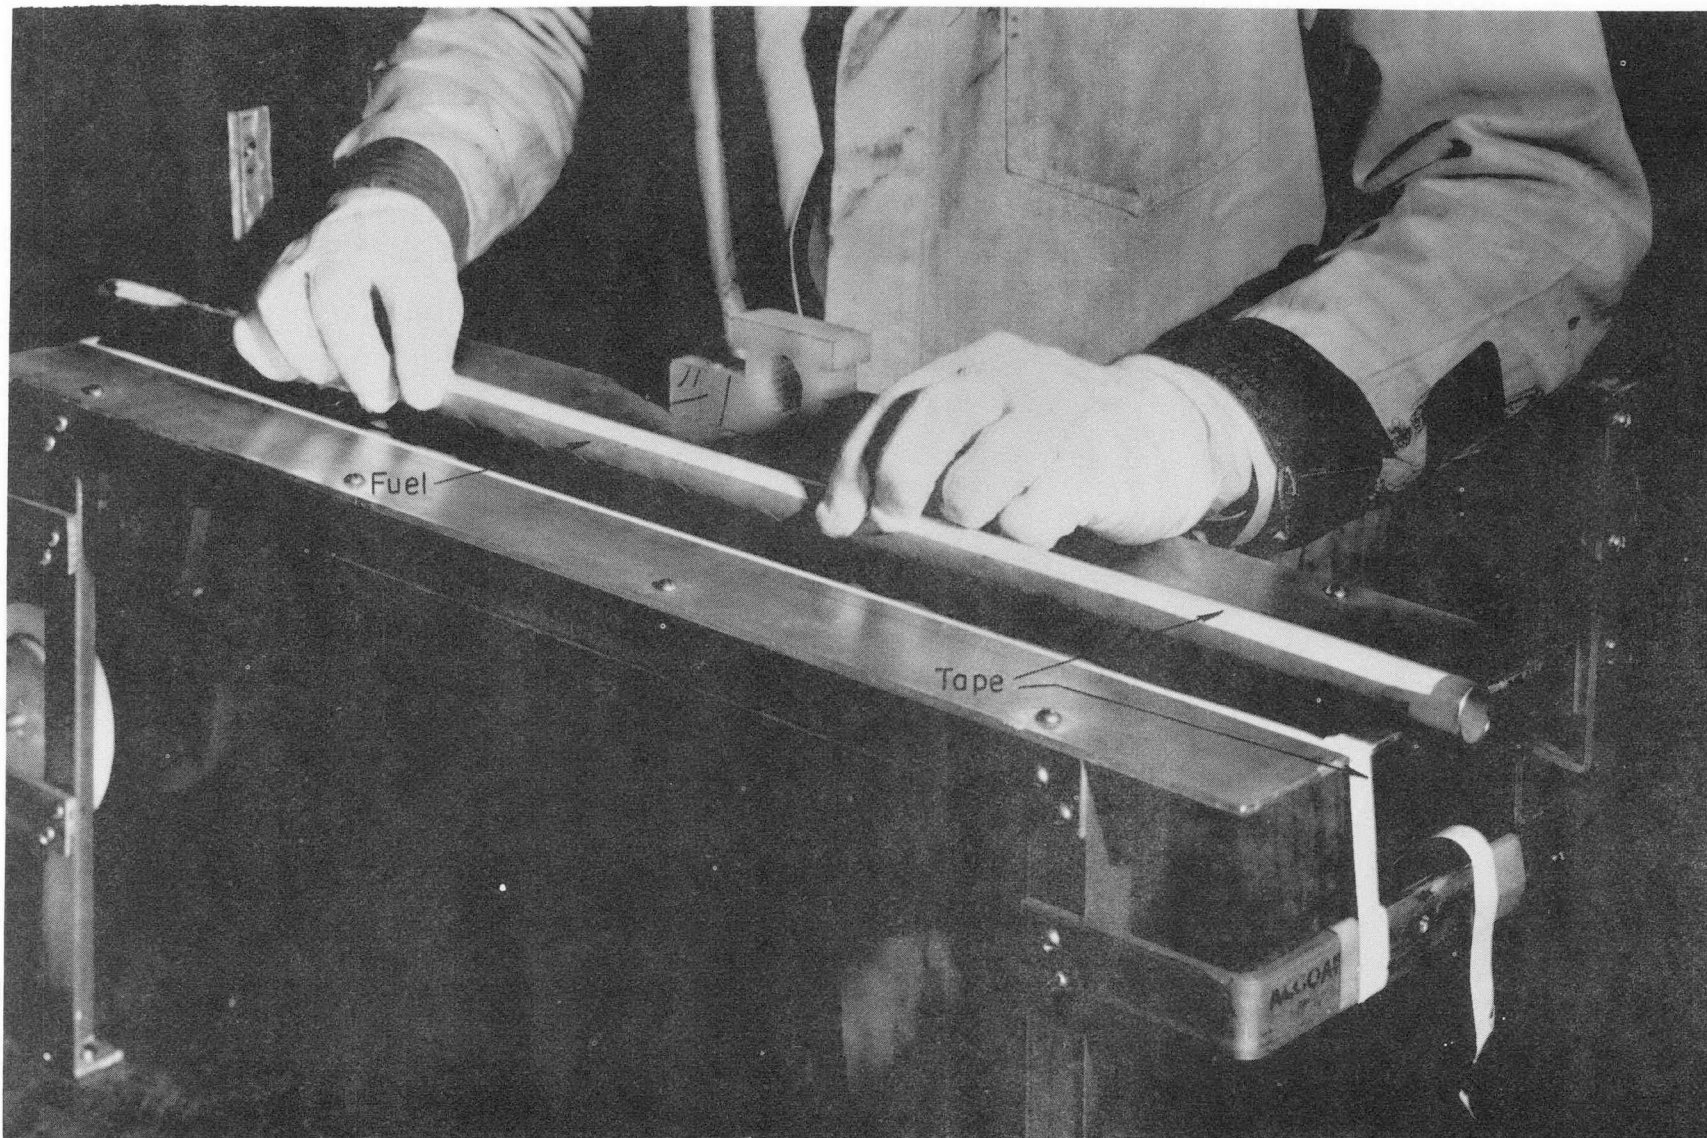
FUEL-ELEMENT ASSEMBLY
